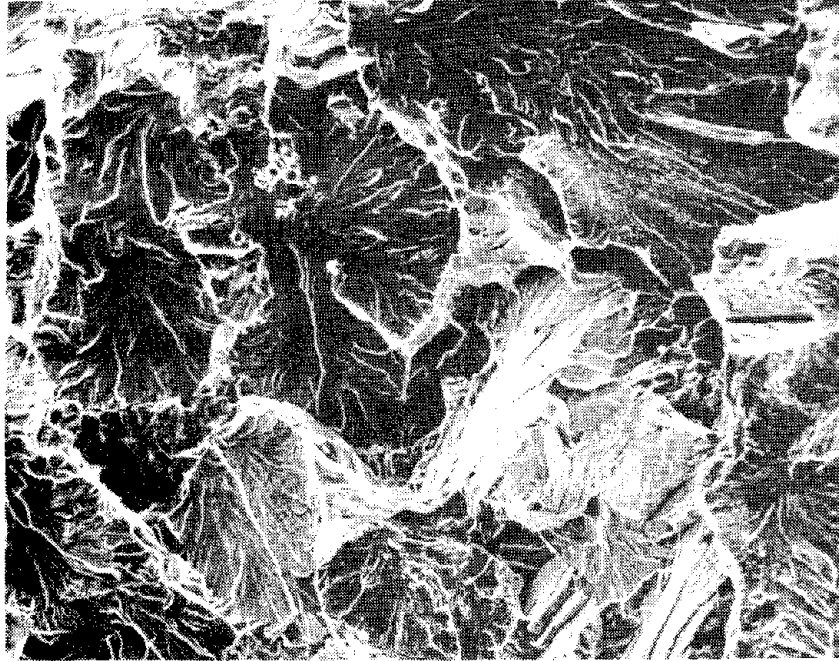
FRACTURE SURFACE OF FIGURE 11; (a) ORIGINAL RAIL SIDE;
